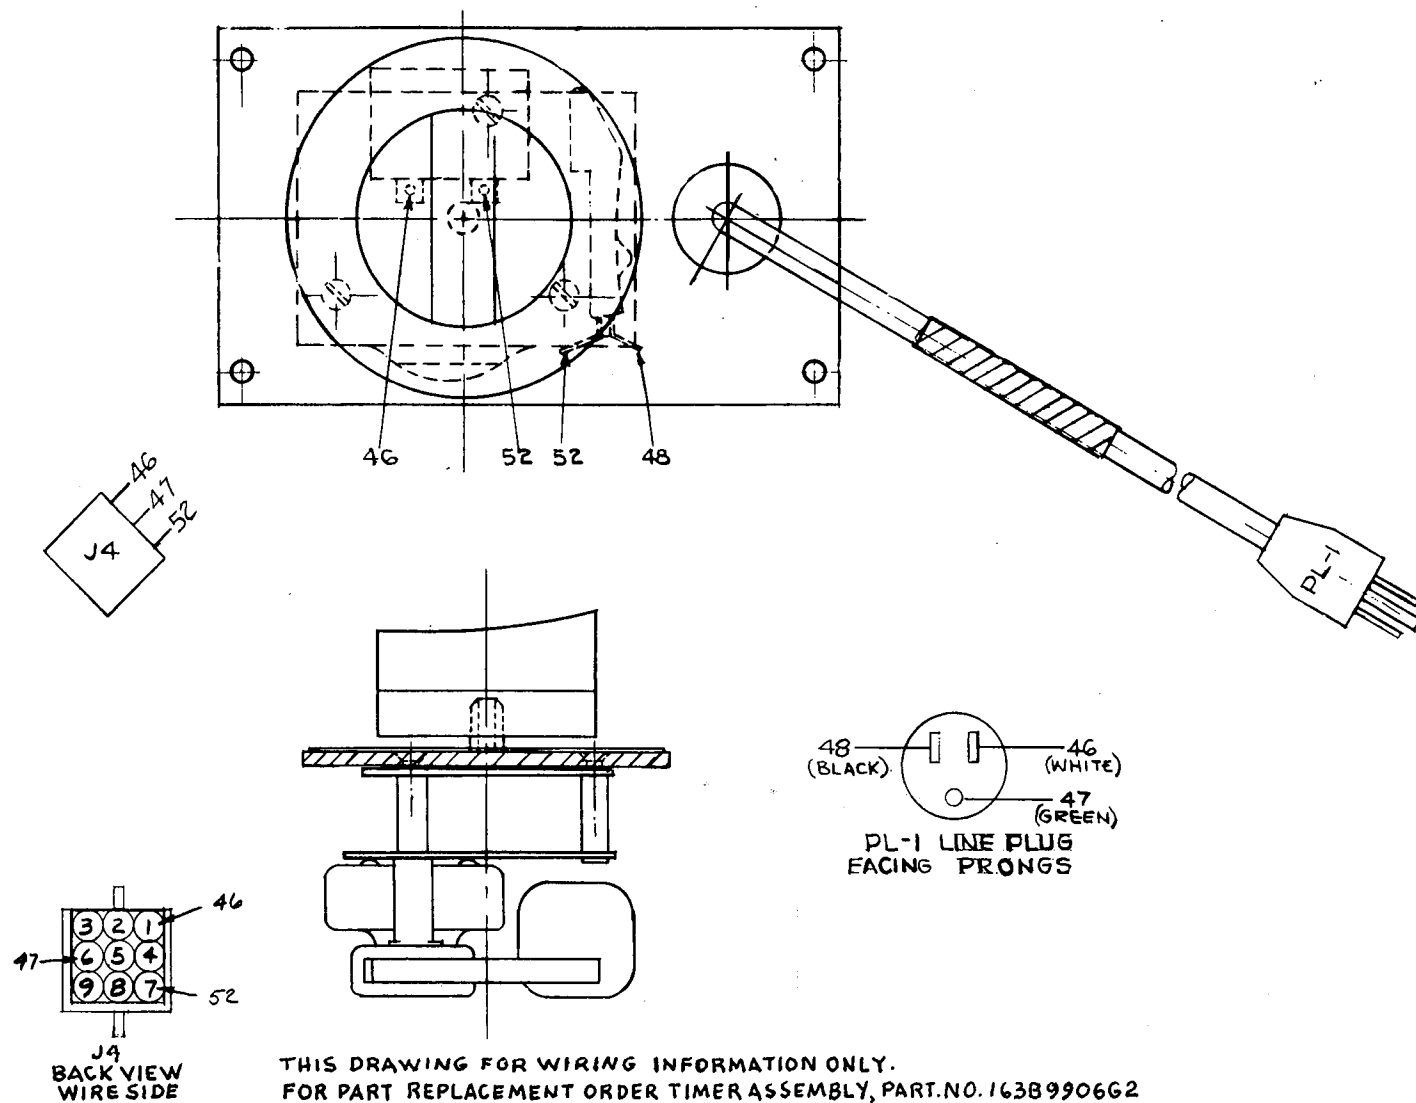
26AE15AA\* Timer Assembly Wiring
